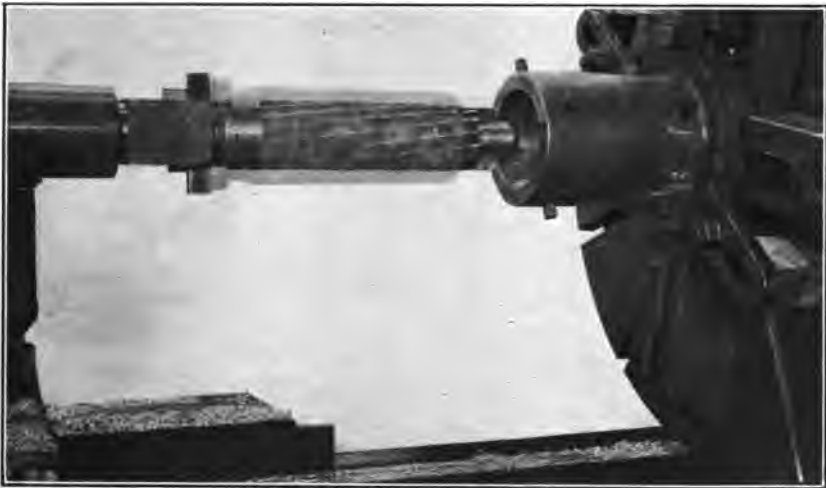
VIEW OF EXTENDING PISTON-ROD BUSHING SHOWN IN "PHANTOM" ON REAMER AFTER THE BORE HAS BEEN FINISHED.
